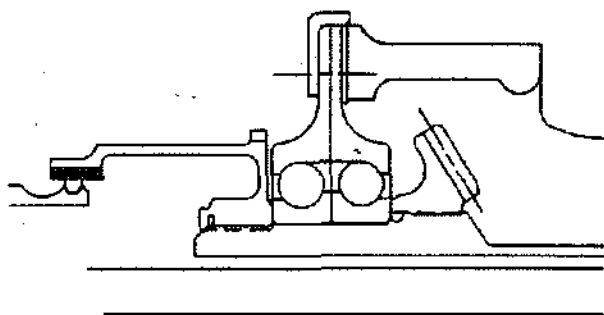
Duplex Ball Bearing Supporting Horizontal Bevel Gear On CF6-6
